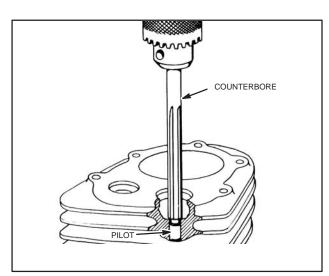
COUNTERBORING FOR VALVE GUIDE
